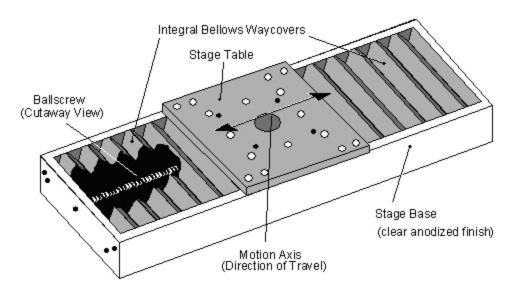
ATS150 with Cutaway View of Ballscrew
